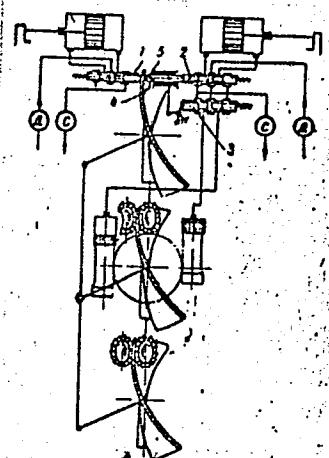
1-3--valves; 4 and 5--feeler rods
